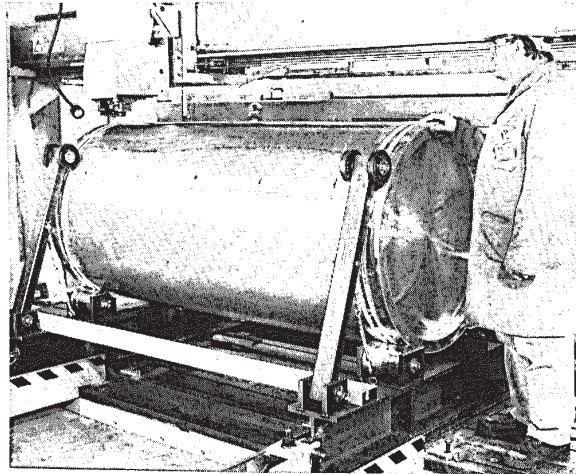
A fully friction stir welded cylindrical tank.
